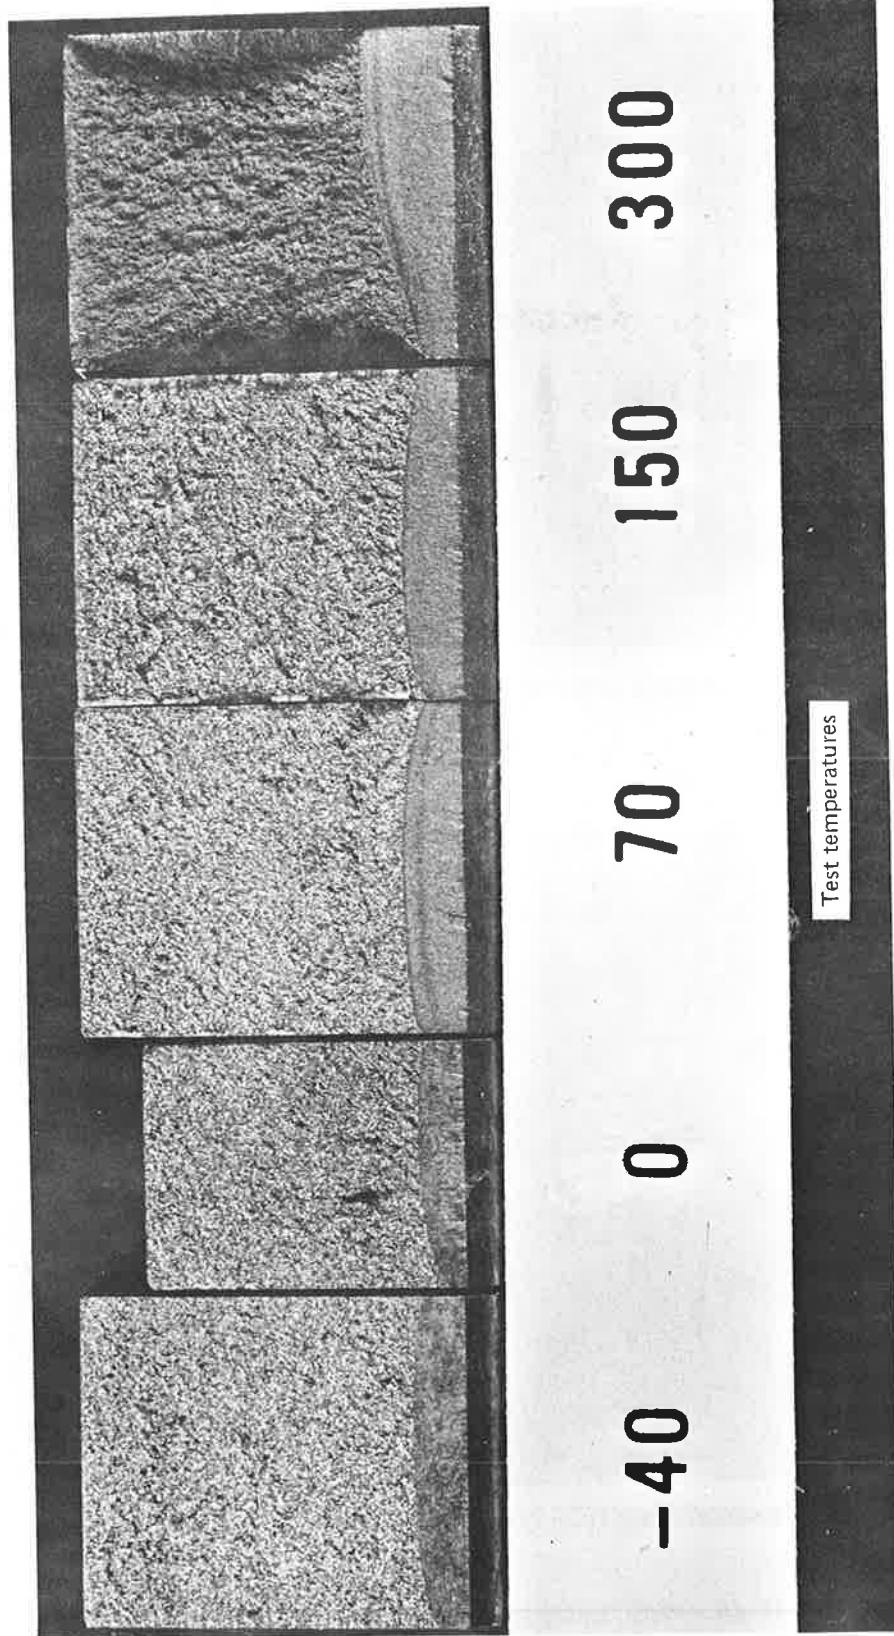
K_{Ic} FRACTURES FROM THE WROUGHT CLASS B WHEEL RIM
